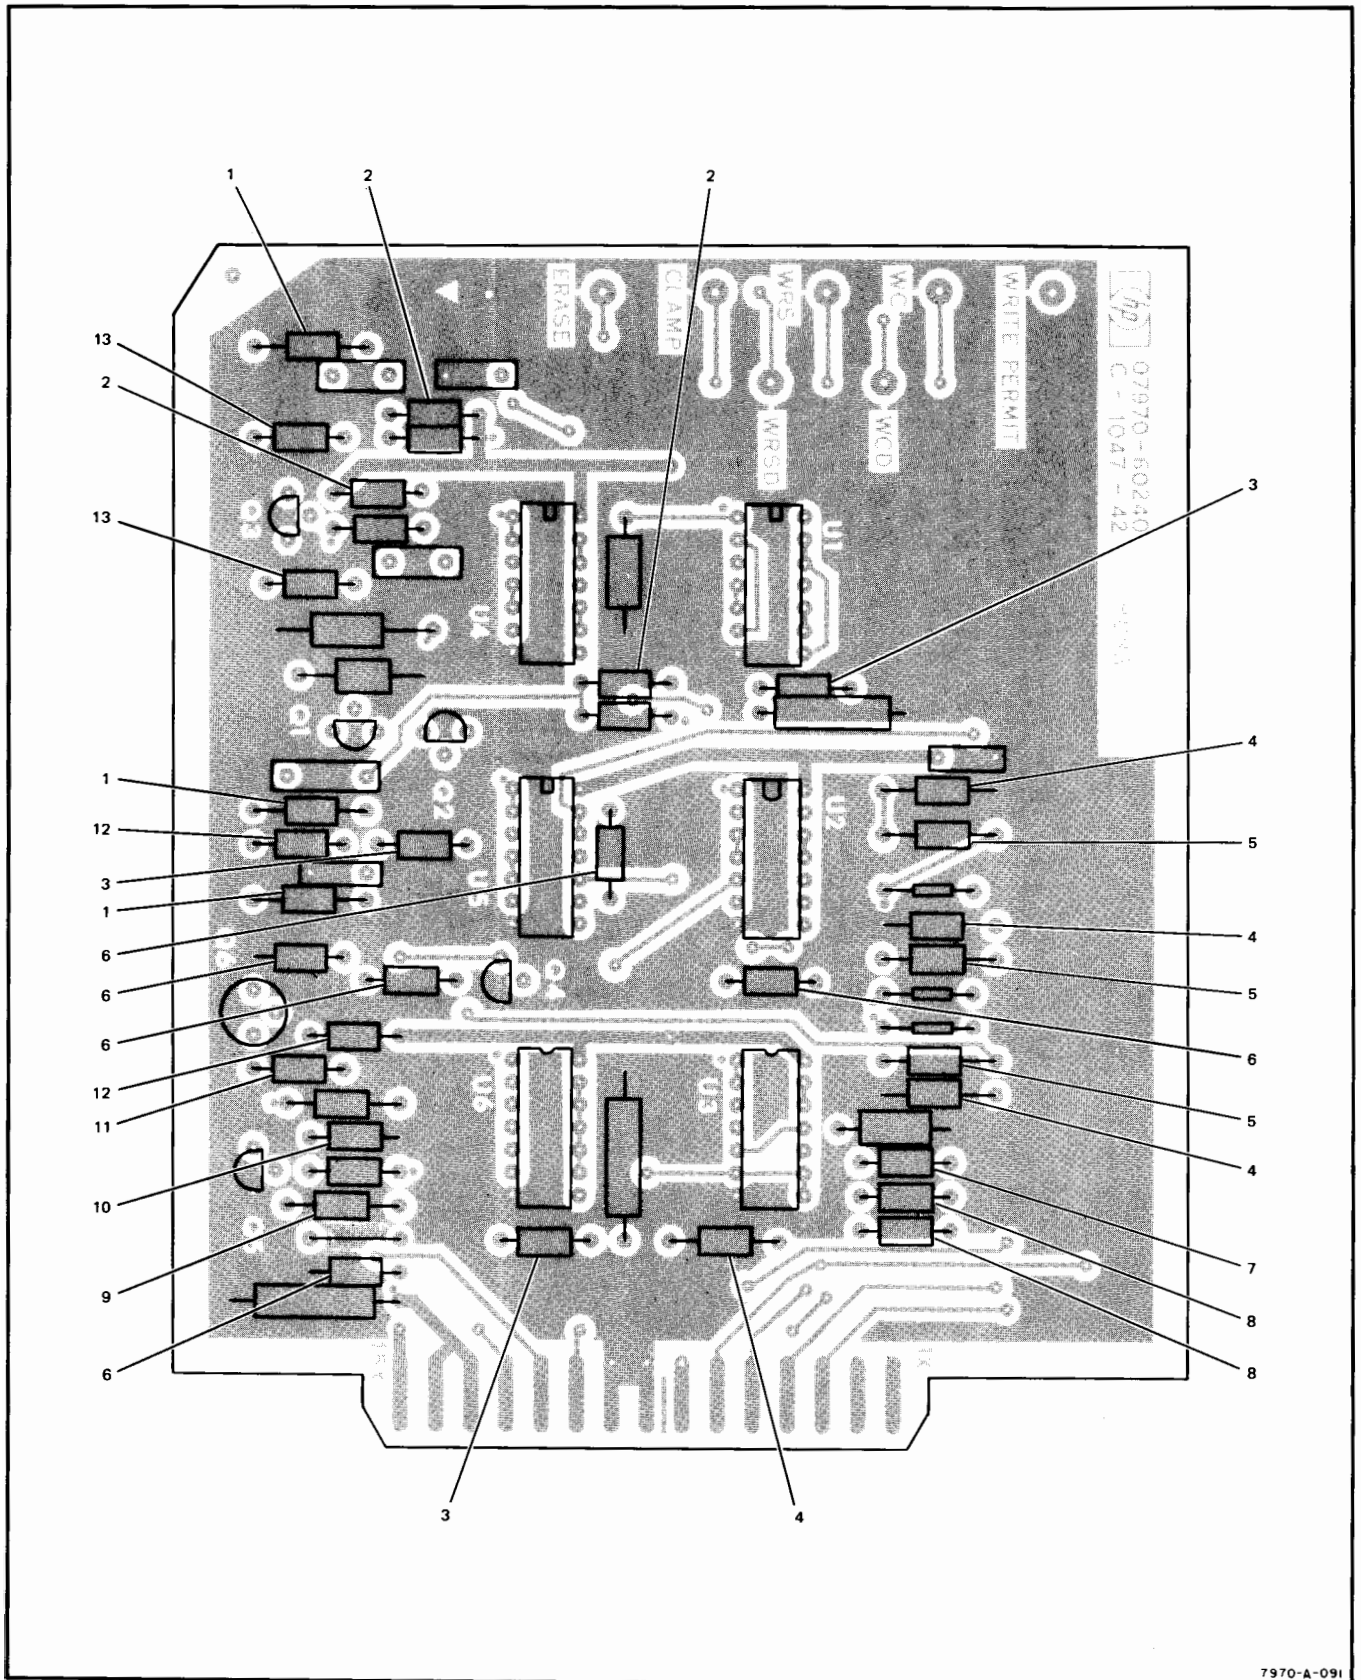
Write Control PC Assembly (Sheet 1 of 2)
